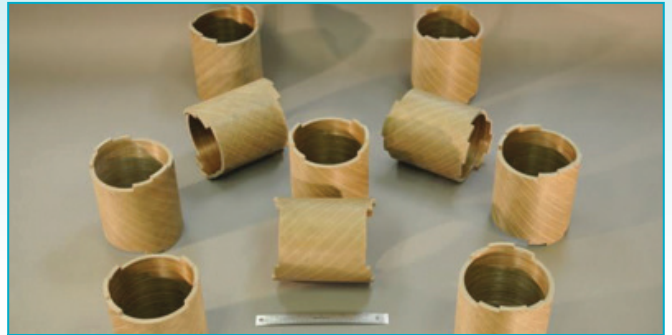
In-situ TPC AFP S2/PEEK oilfield stru.
